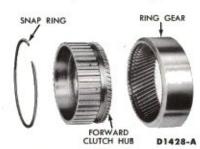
Forward Clutch Hub and Ring Gear Disassembled
